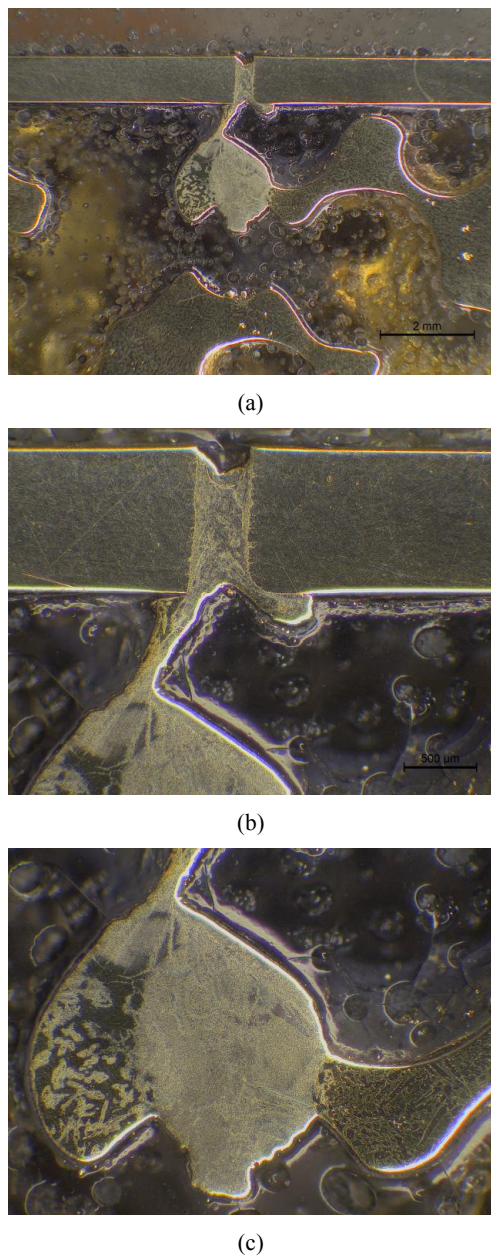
Welded bead, performed at 15 mm/s in lap joint configuration: complete view (a); magnification of the thin plate (b) and of the foam (c)
